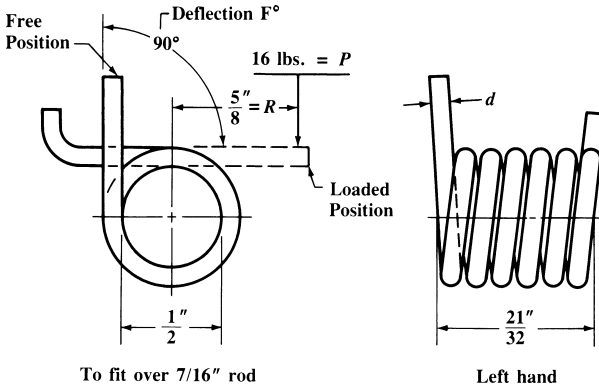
Torsion Spring Design Example. The Spring Is to be Assembled on a $\frac{7}{16}$ -Inch Support Rod
